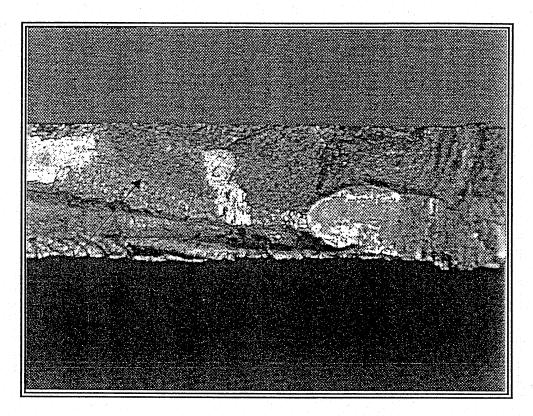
Photograph of the crack arrest lines on the fracture surface of the witch's hat flange section (arrow)
